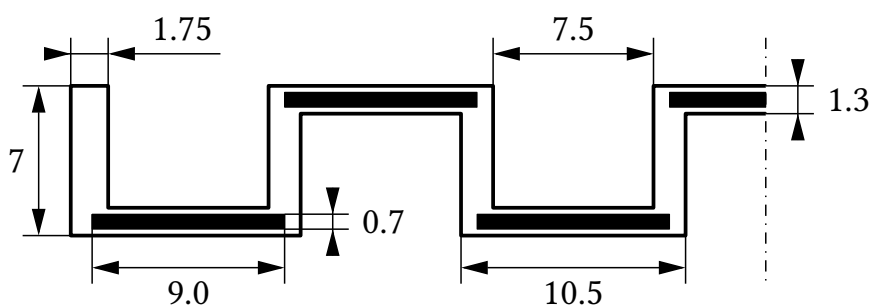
Back side of the fuel injector, dimensions in mm.
